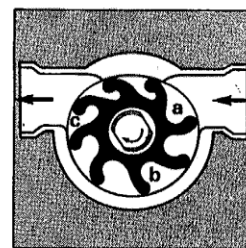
FLEXIBLE IMPELLER PUMP (Jabsco)
